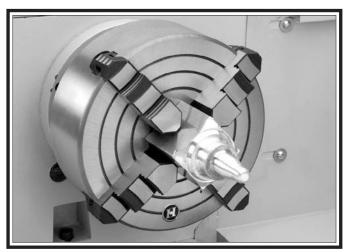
Example photo of non-cylindrical workpiece correctly mounted on the 4-jaw chuck.
